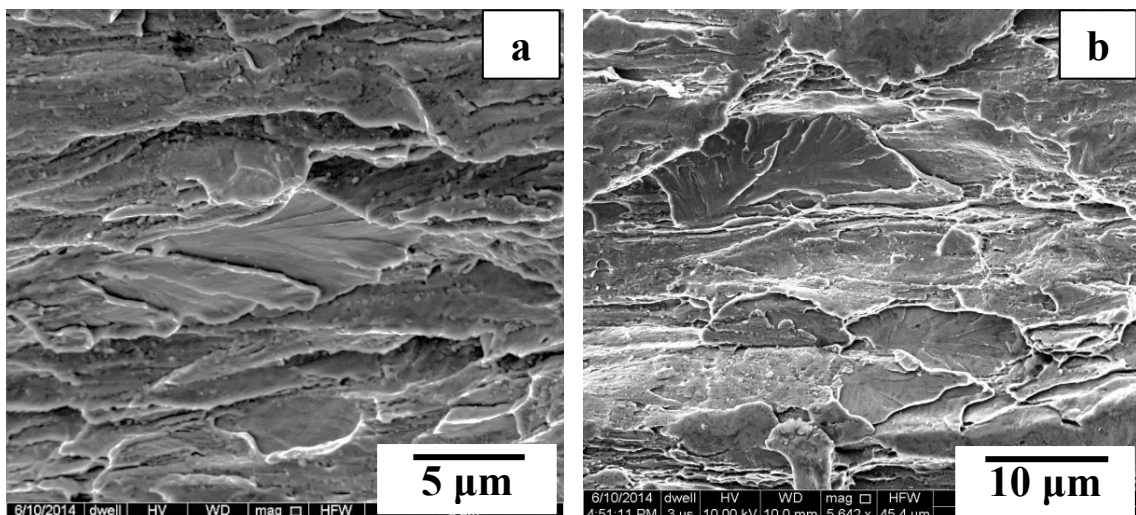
Cleavage fracture resulting from longitudinal splitting of N₁+T specimen tested in tension.
